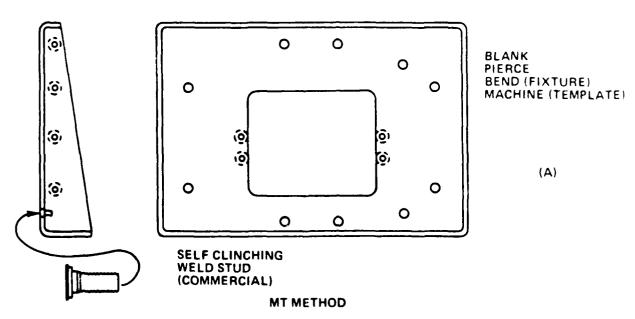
MOUNTING BRACKET WAVEGUIDE SIDE
